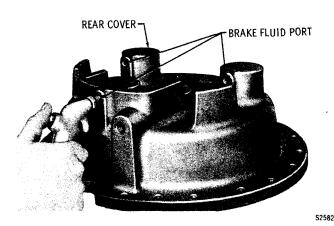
Removing brake pistons from rear cover (TTB)
